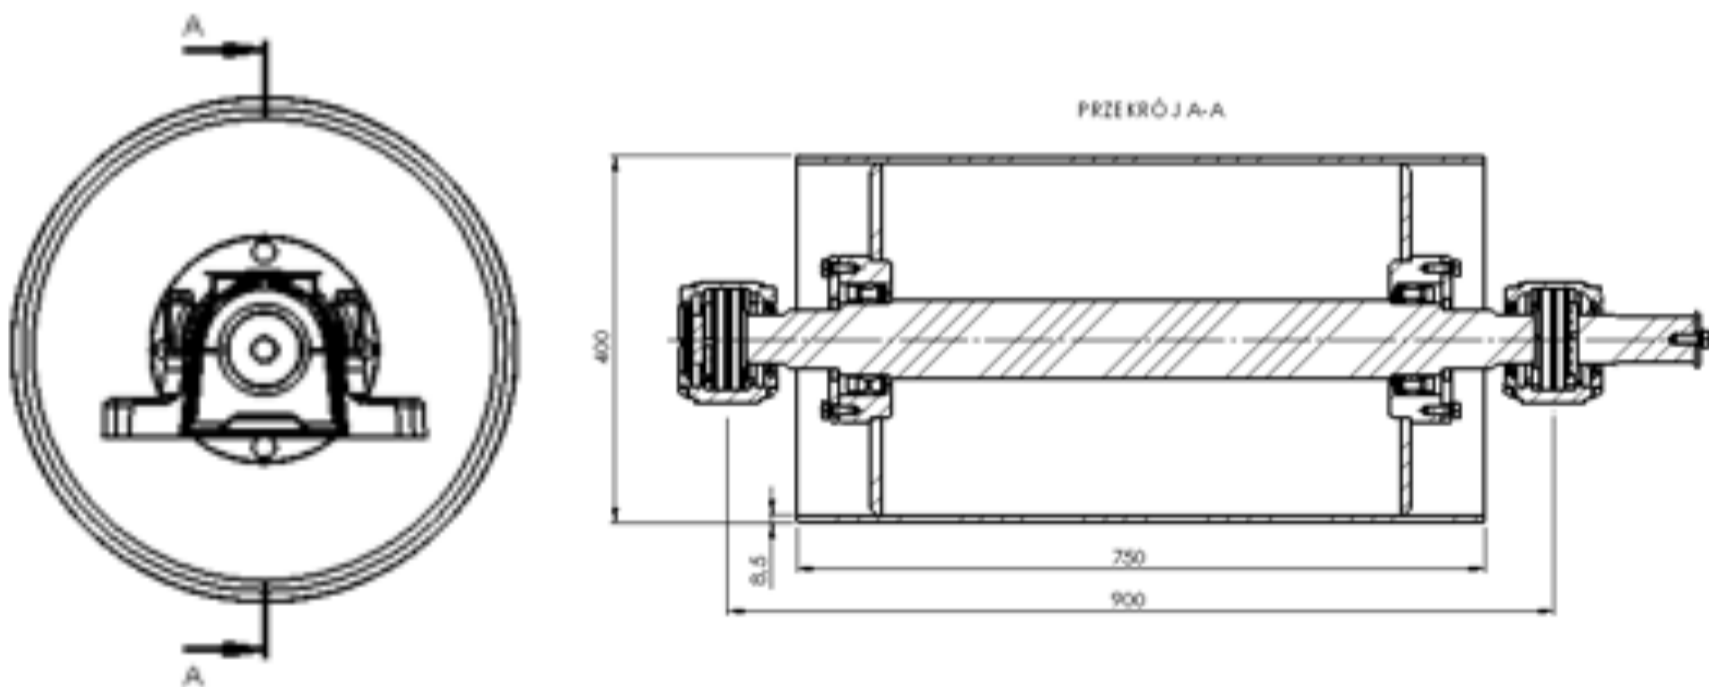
Example installation — drive pulley — technical assembly drawing.
